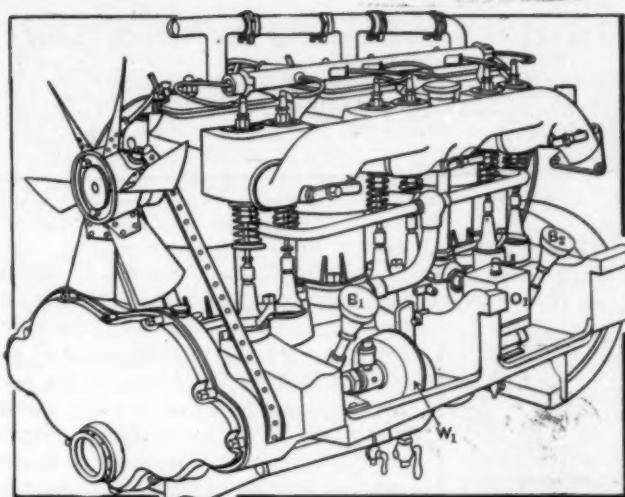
Left-hand side of the six-cylinder motor, depicting the position of the water pump and the automatic oiler
